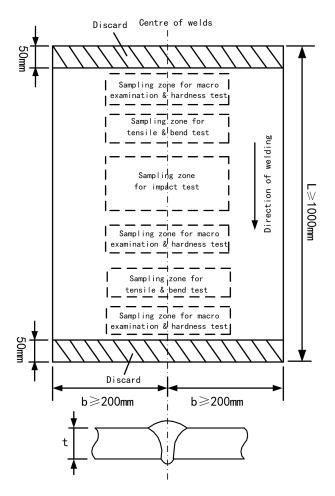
Diagram of butt weld test assembly and sampling positions
